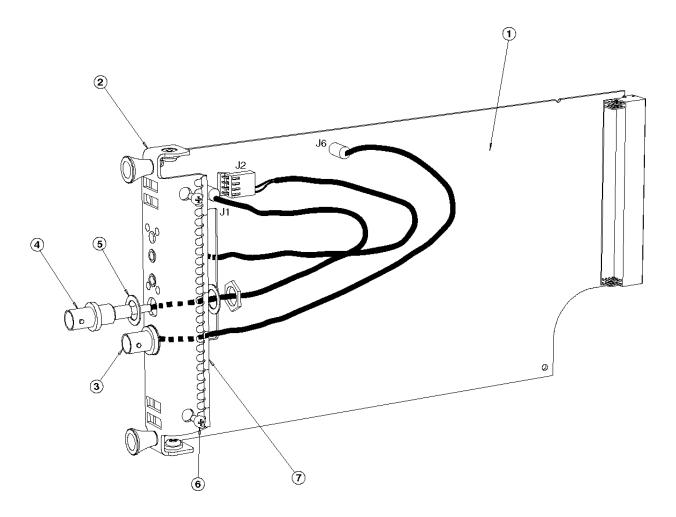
Option UHK Jitter Tx Module - Exploded View
